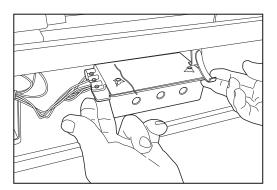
To remove the remote control module, remove screw from lid, remove lid and disconnect wiring, the module can then be removed.
